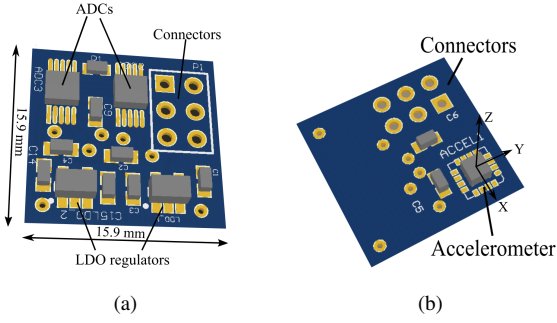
Sensor module printed circuit board: (a) top (b) bottom views.
